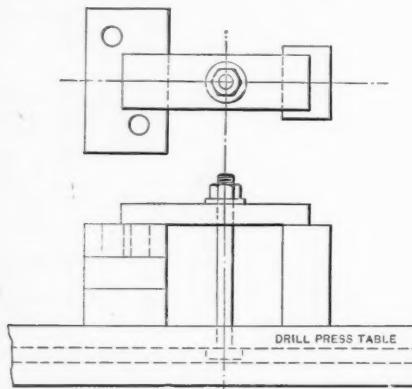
Holding Jig and Work on Drill Press Table. Two Pieces drilled at Once.
